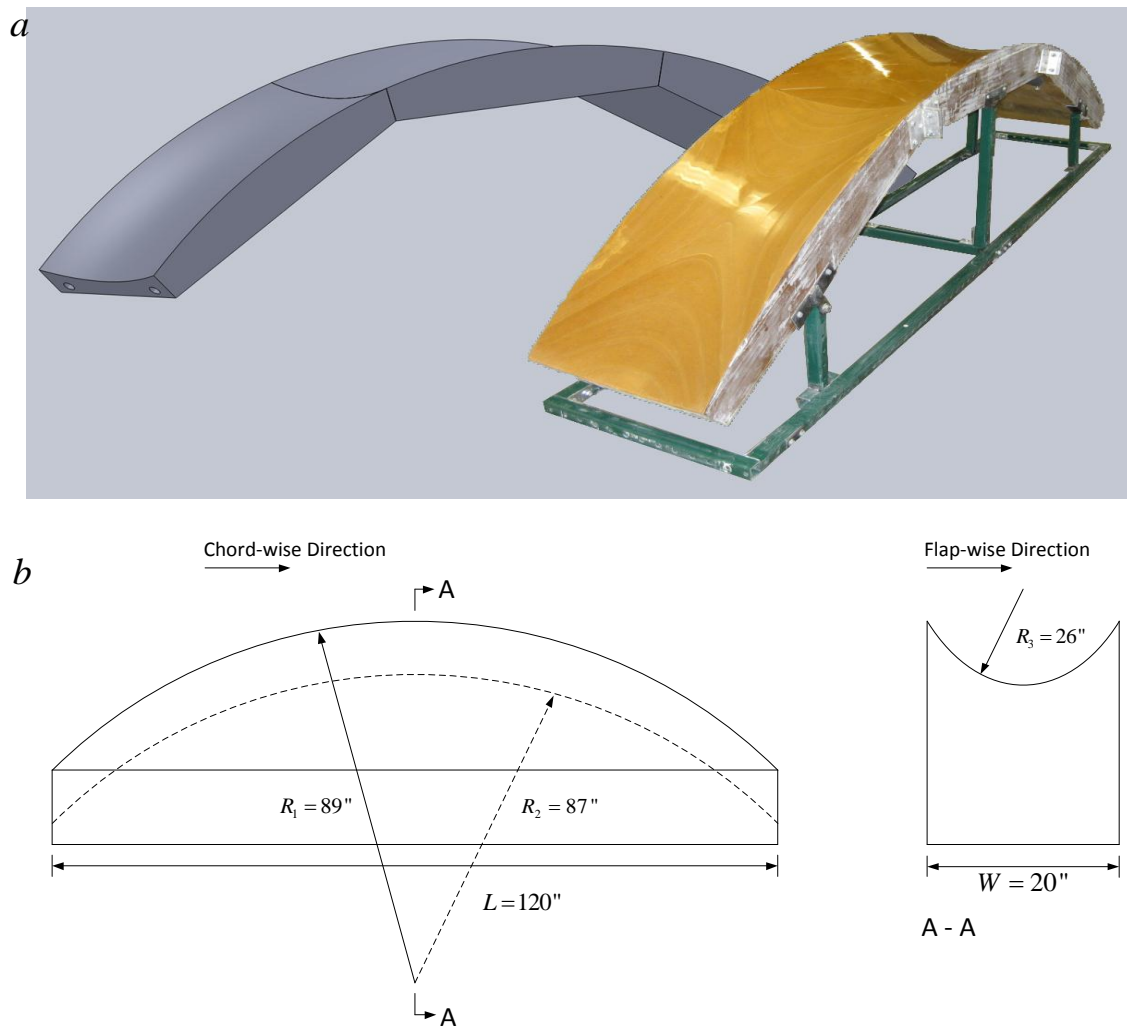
(a) 3D mold used in experiment; (b) mold dimensions.
